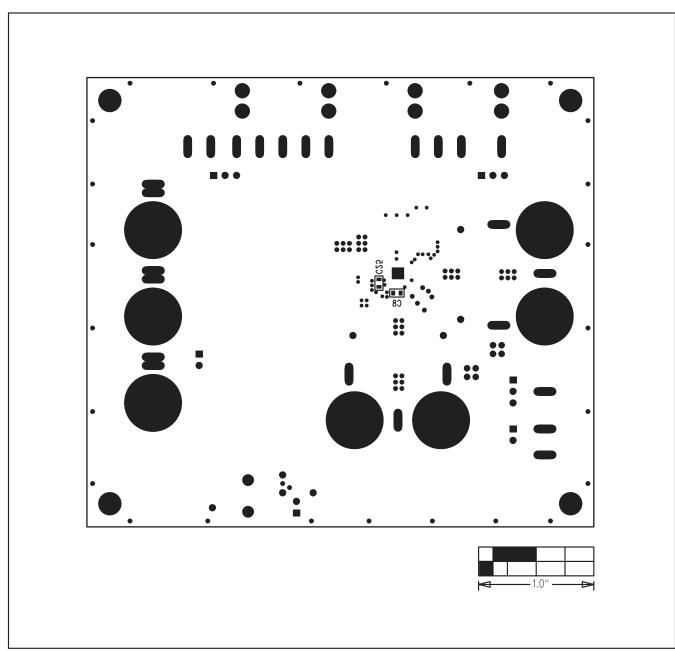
MAX9791A EV Kit Component Placement Guide—Solder Side
